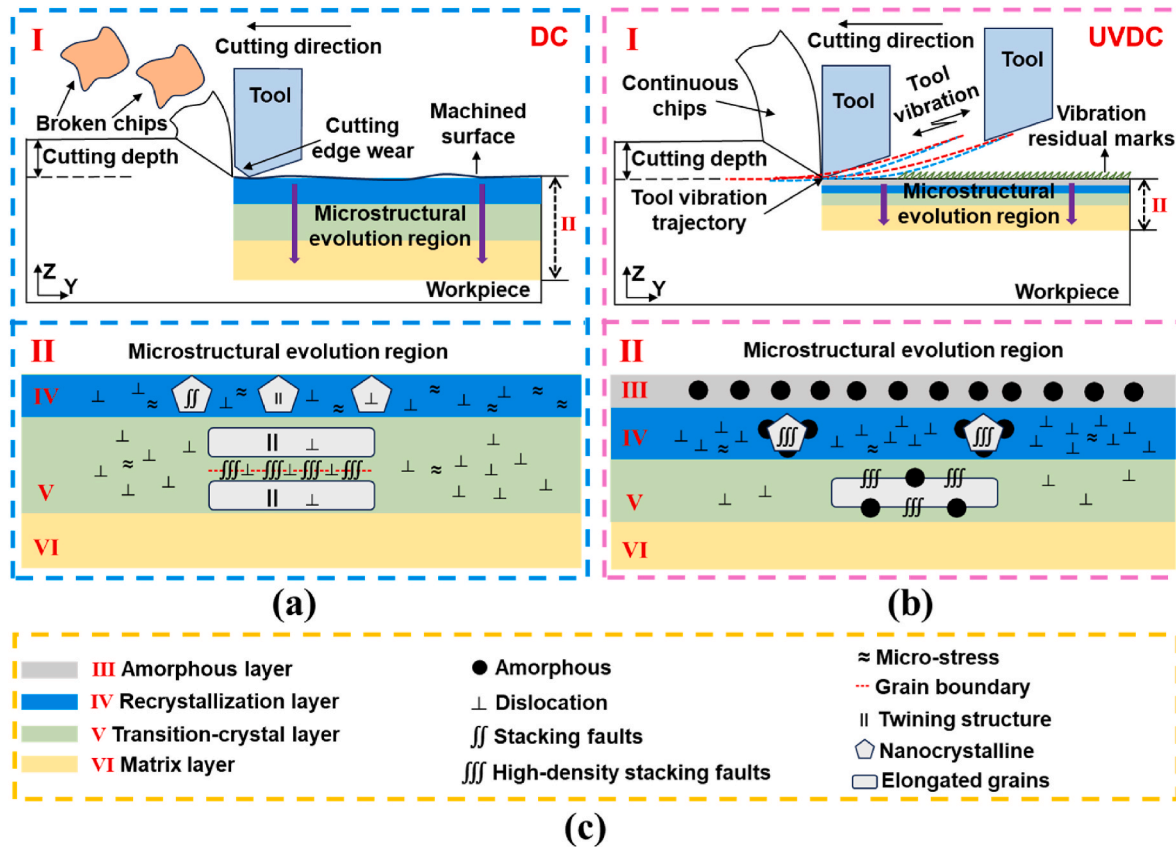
Schematic diagram of the material removal mechanism of HEA workpiece with or without ultrasonic vibration assistance. (a) After DC machining; (b) after UVDC machining; (c) the meaning of different symbols.
